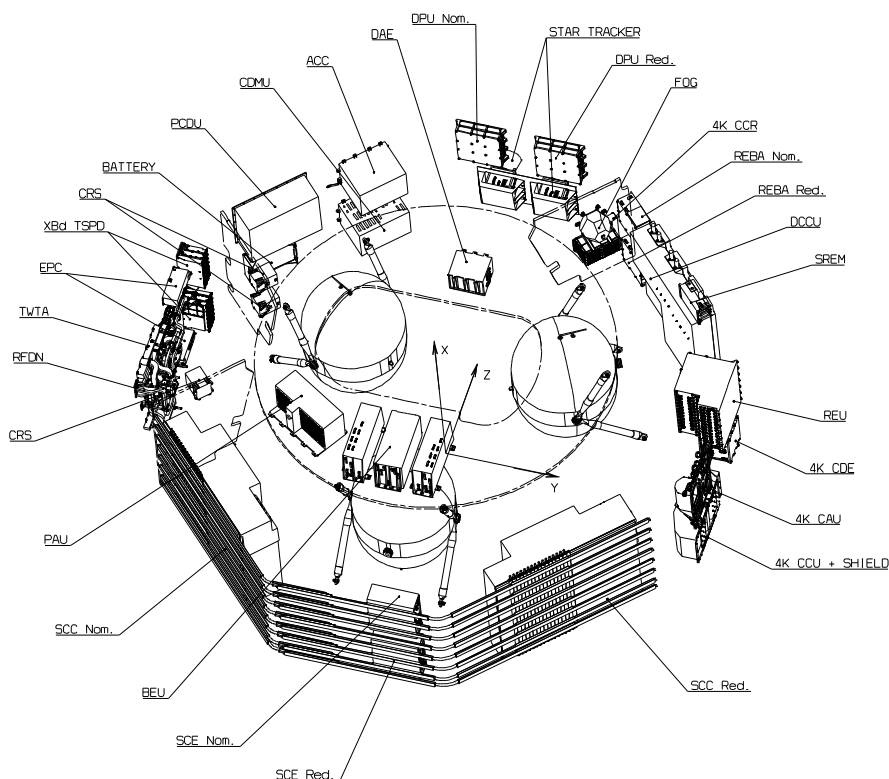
PLANCK SVM general layout Electrical and functional systems design
